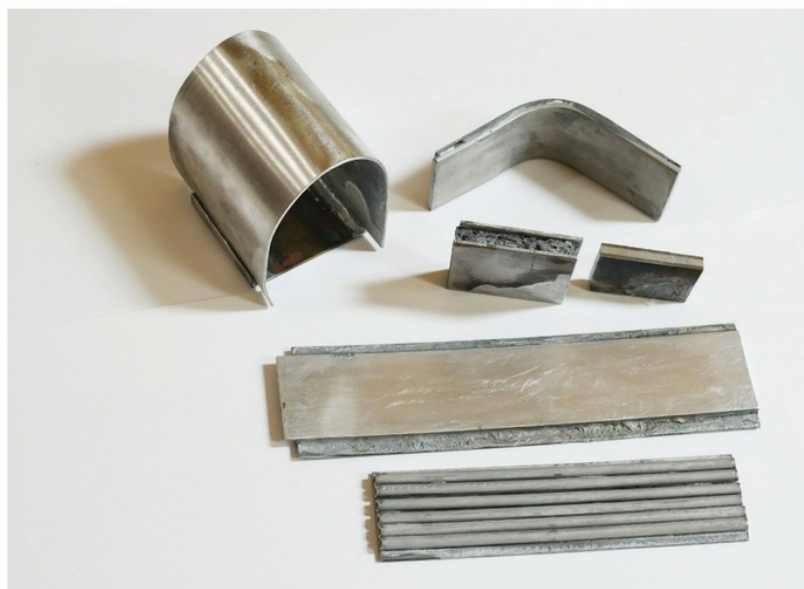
Soldered lightweight aluminum-steel prototypes with weight savings from 35 to 72%.
